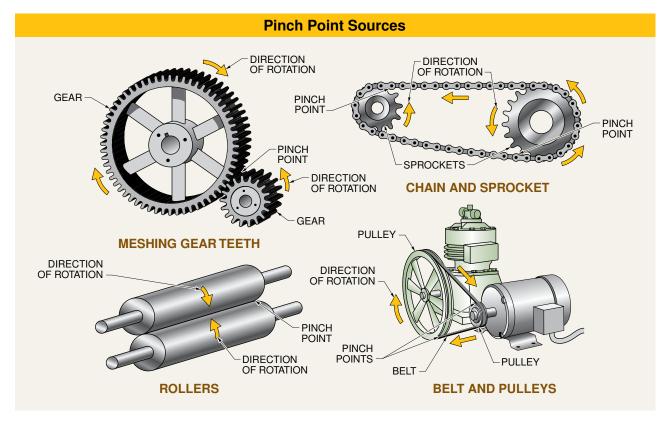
Common sources of pinch points include rotating equipment that has meshing gear teeth, chains and sprockets, rollers, belts, and pulleys.
